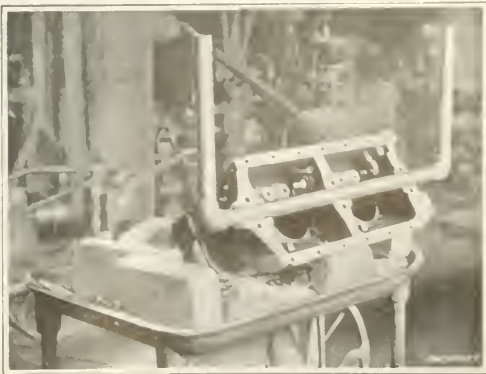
Pipe Mandrel used to prevent Melting of Babbitt Bearings
